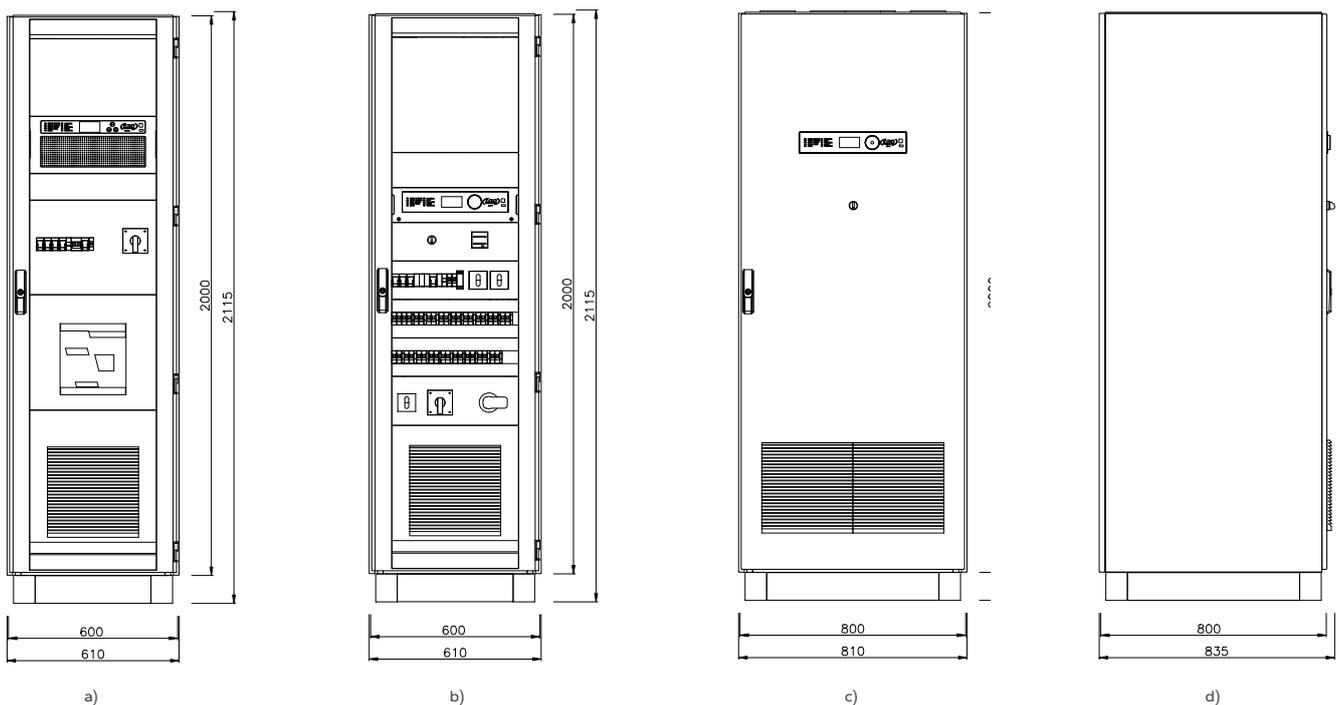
Views with dimensions of the BF1z / BFI type inverter cabinet:
